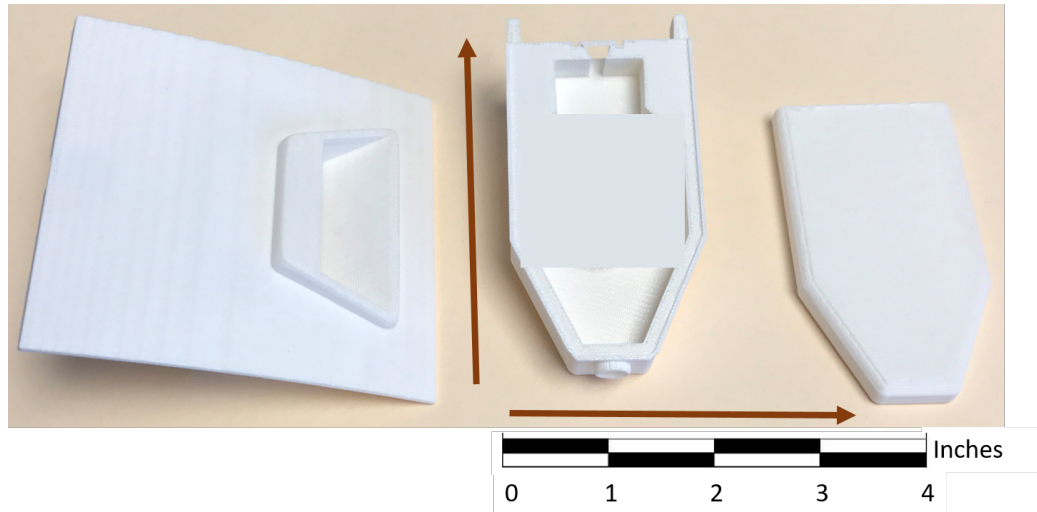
FO parts from left to right: sleeve, actuator, actuator cover
